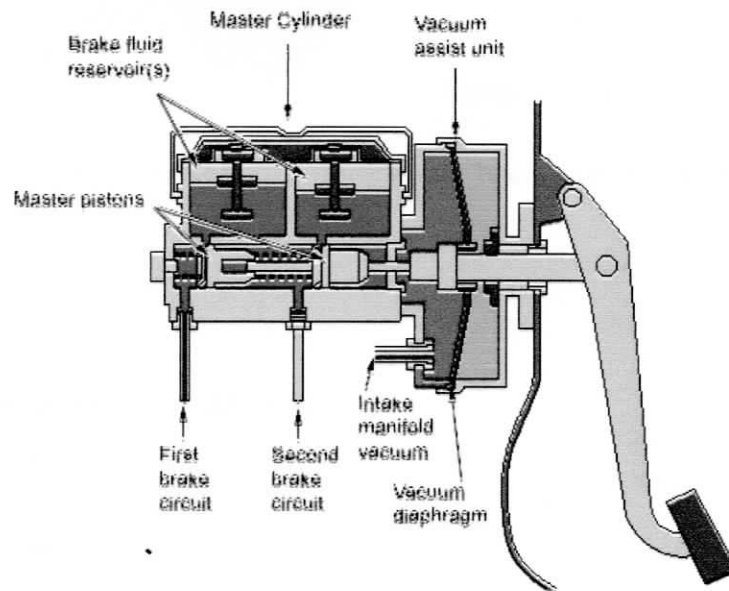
Diagram for assembly master cylinder and pedal.
